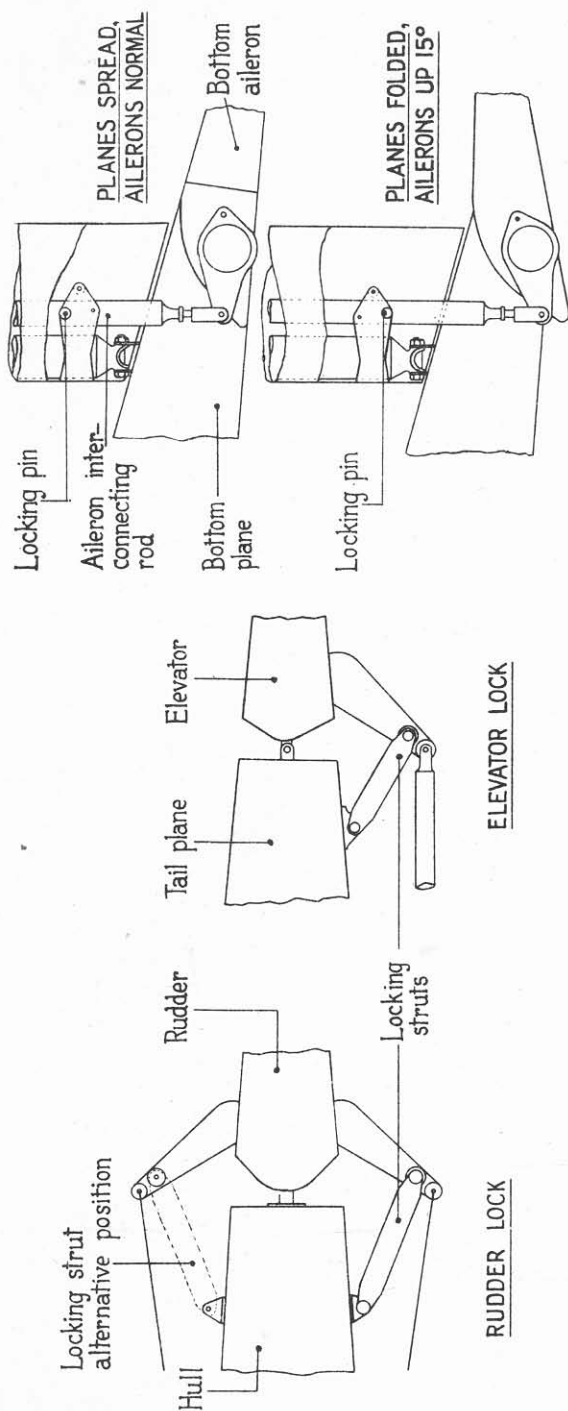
AILERON, ELEVATOR AND RUDDER LOCKING GEAR
